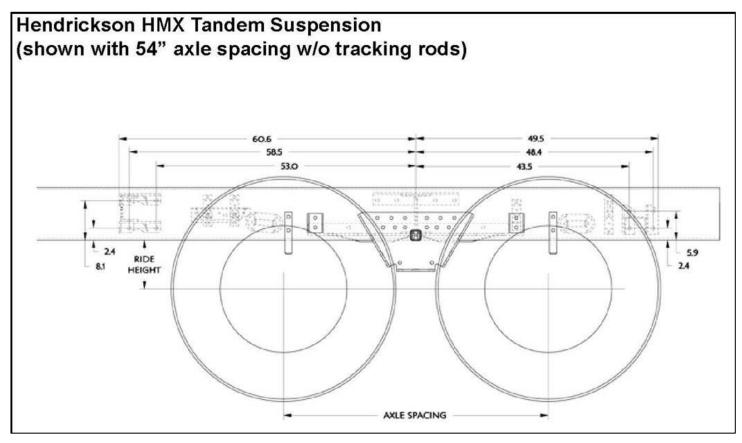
Hendrickson HMX Tandem Frame Drilling
